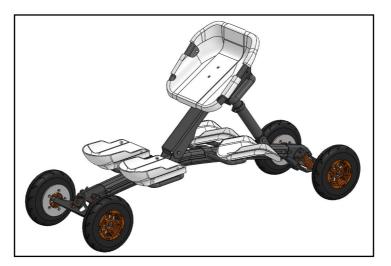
Manufacturable Design; Spike Source: Exero [7]
